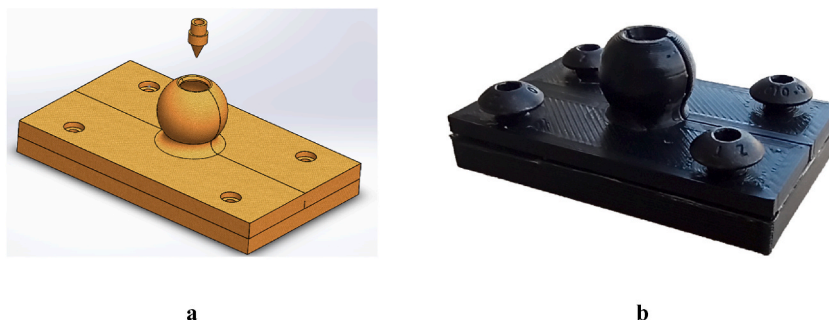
a) designed file for fixture in SolidWorks and Cura, b) built fixture by 3D printer.
